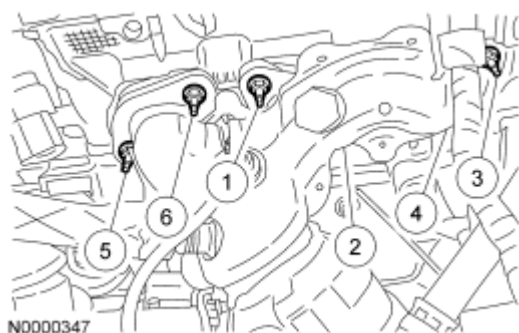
Identifying Tightening Sequence Of RH Exhaust Manifold Nuts
